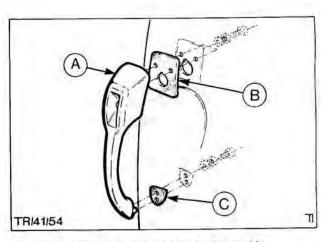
Exterior handle and mounting pad assembly A - Handle
